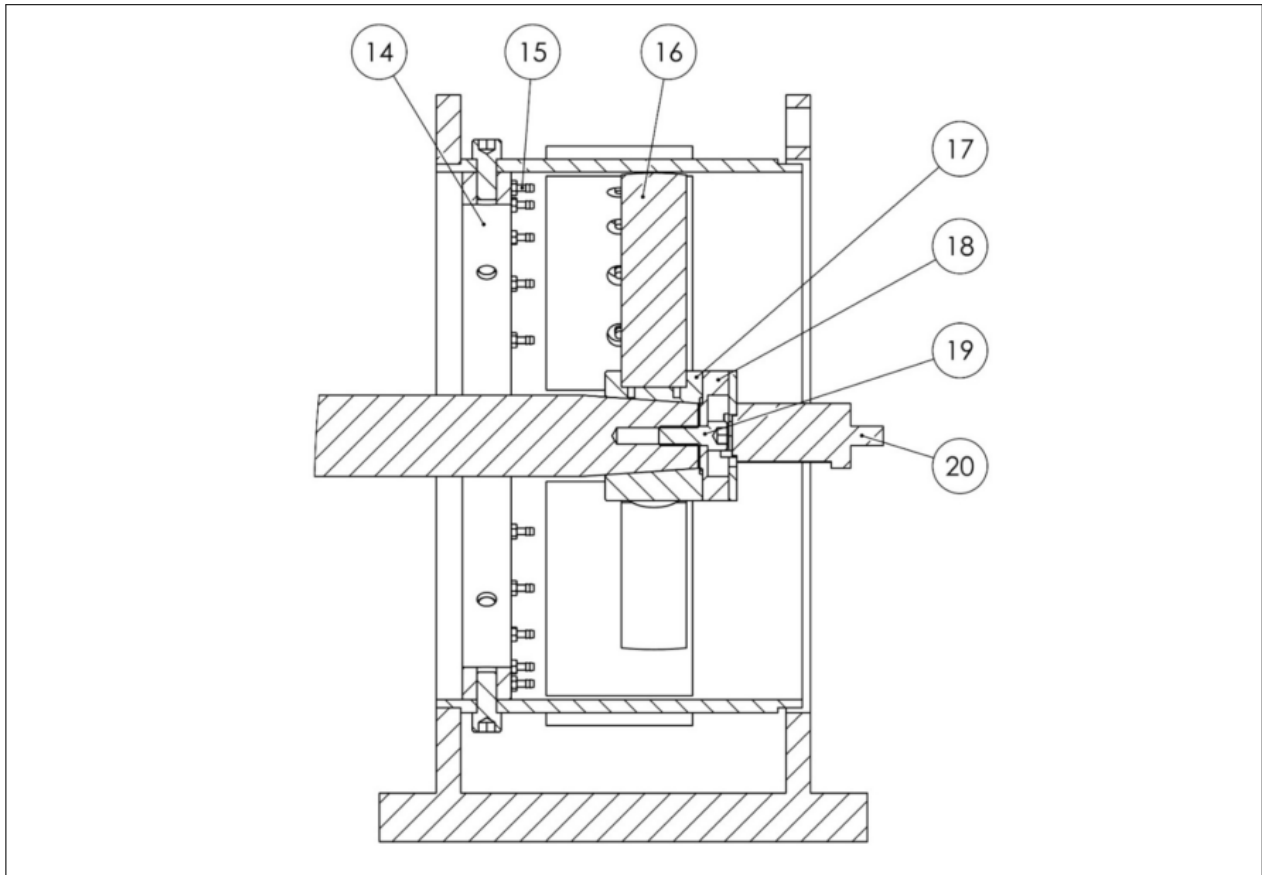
Rotor cross-section with slip-ring, adapted from [Church, 2015].
